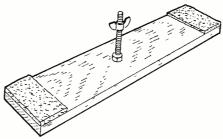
Clamping strip with padded ends. The bolt is locked to the wood strip.
